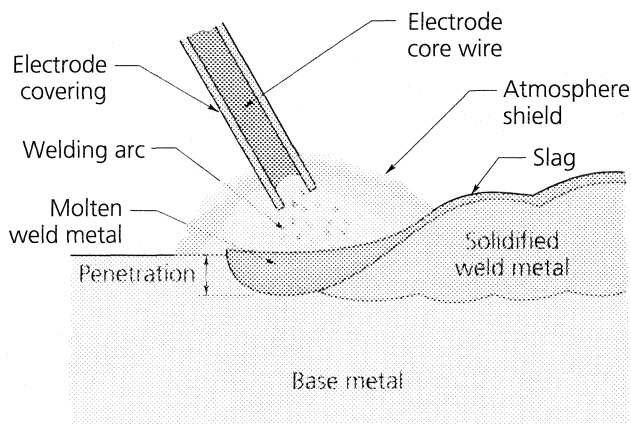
Manual Shielded Metal Arc Welding
